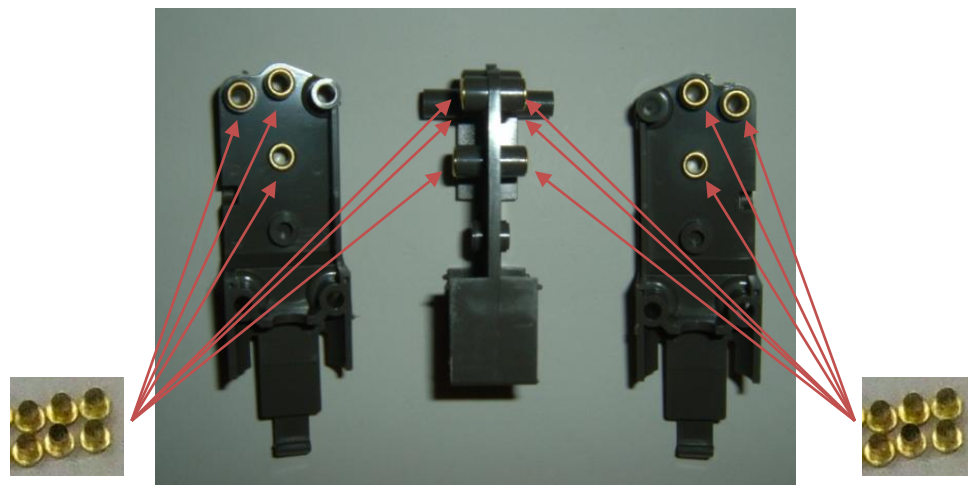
12 Gold Bushings Inserted in Gearbox Pieces (You will assemble one half at a time so only place bushings on one side of the middle bracket initially.)
